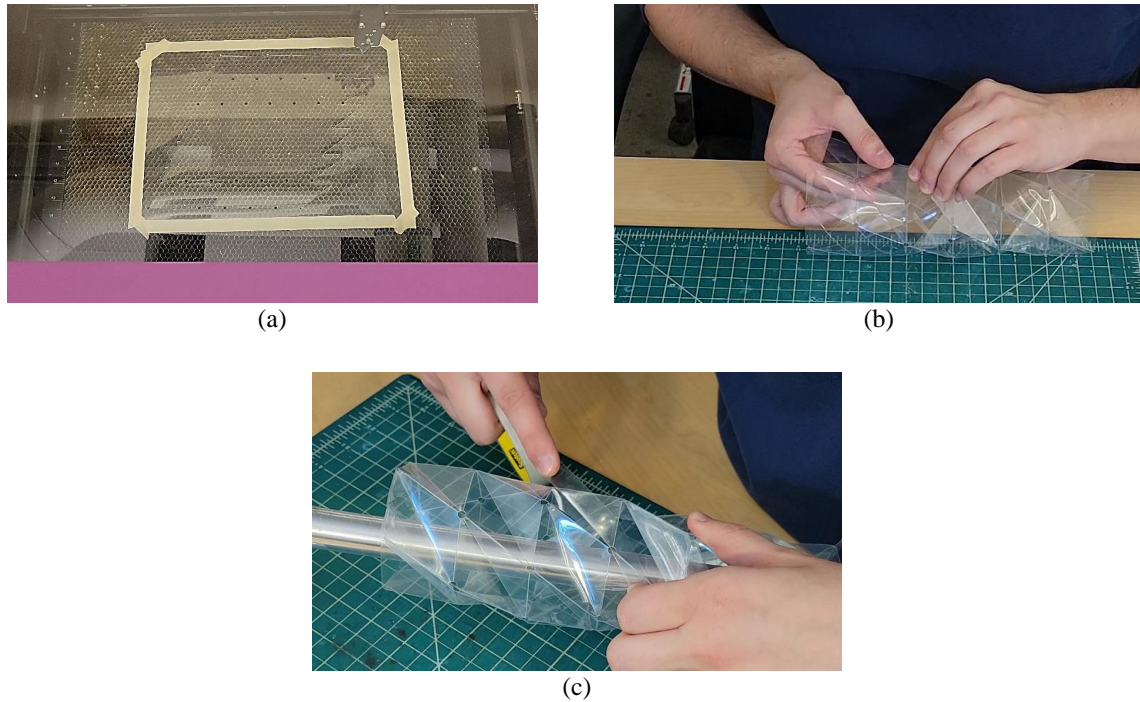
The steps to construct and prepare the mandrel for wrapping. (a) The desired fold pattern is engraved/cut from the PET roll using a Universal VLS-4.6 laser cutter. (b) The mandrel is folded along the desired engraved mountain and valley creases and closed using double-sided tape in its bonding regions. (c) The mandrel is covered with a layer of double-sided tape.
